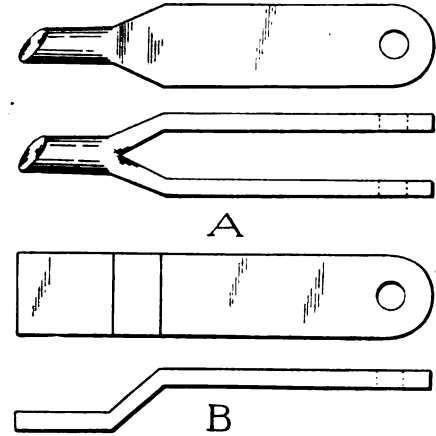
MAKING A BRAKE-ROD JAW FOR LIGHT LOCOMOTIVES.
